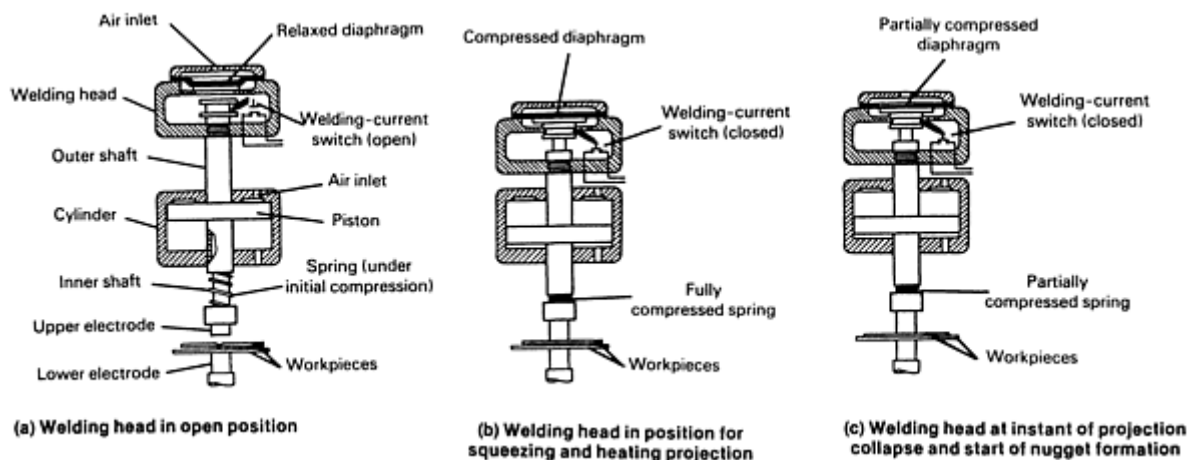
SCHEMATIC SHOWING MOTION OF INTERNAL COMPONENTS IN A LOW-INERTIA WELDING HEAD USED FOR PROJECTION WELDING OPERATIONS
